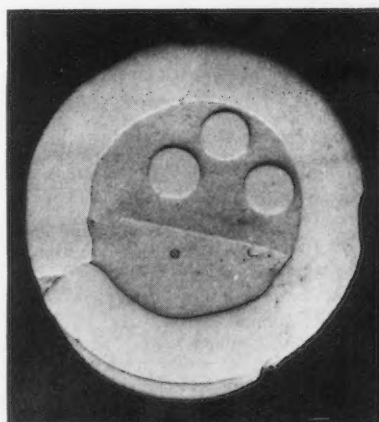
Cross-section of specimen-lead wire connection. Annular ring is copper connector, smaller circular sections are lead wire ends, and rectangle is specimen end. Matrix material is solder.
